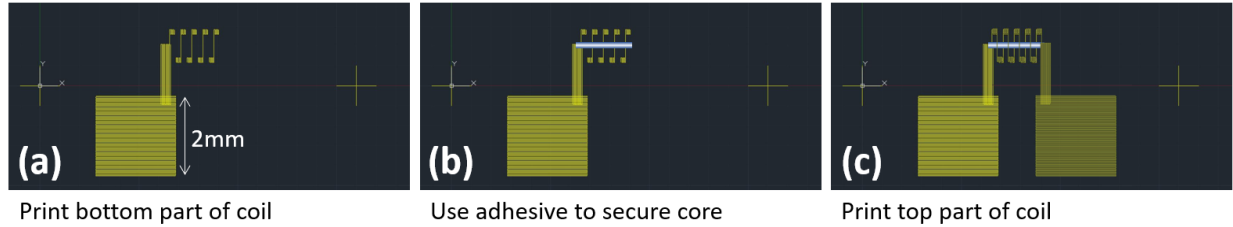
Schematic of the new fabrication method using CAD images for (a) printing the bottom part of the coil, (b) applying the adhesive and core, and (c) printing the top part of the coil.
